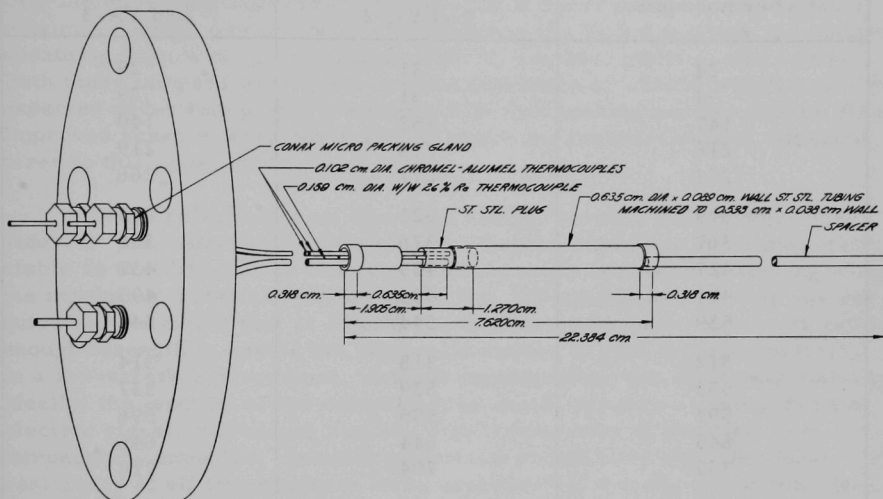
Fixture for Determining Thermocouple Radiation Damage; EBR-I
